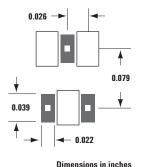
Recommended PCB Pad Layout for Avago's SC70 3L/SOT-323 Products.
